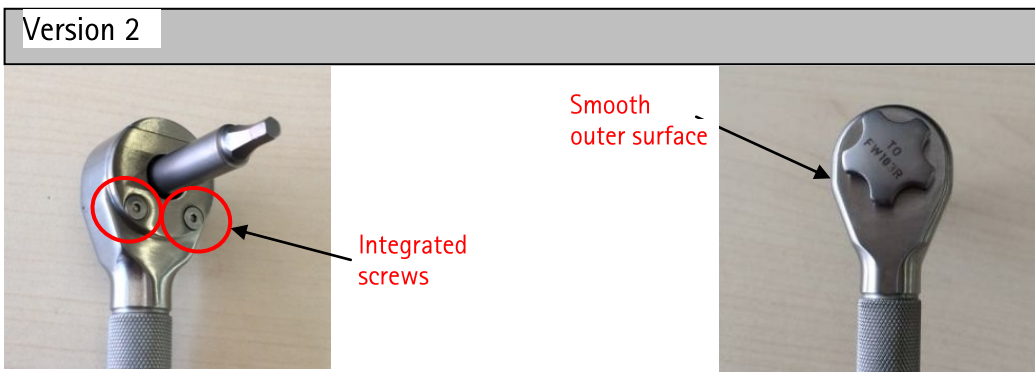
(left): Inner surface of the torque wrench with hexagon bit inserted.
